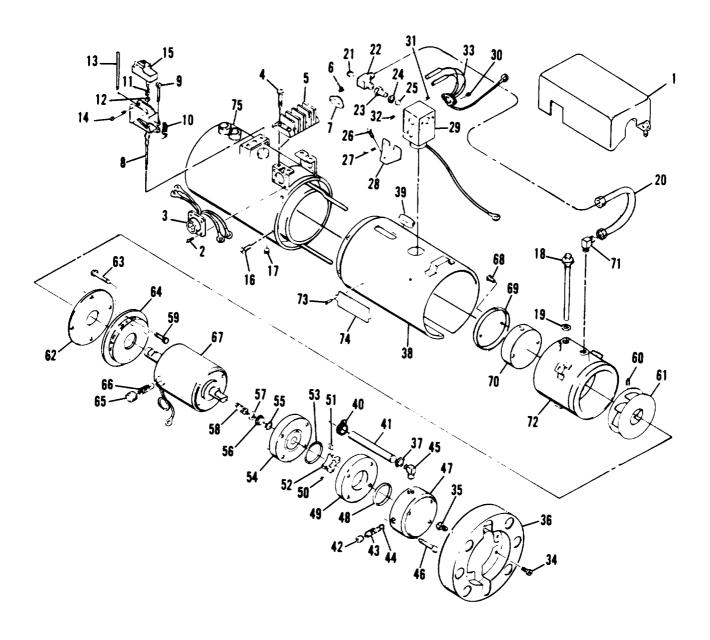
Fuel Burning Heater Assembly, Exploded View (Sheet 1 of 2)
